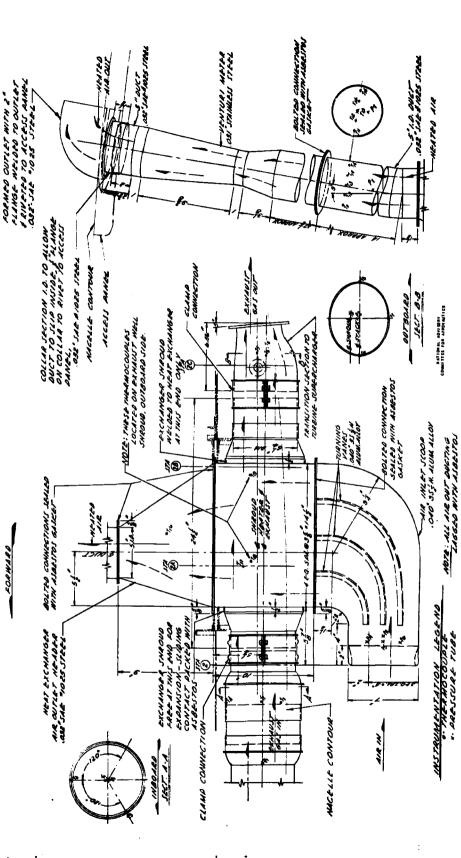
HEAT EXCHANGER S INSTALLATION IN MACELLE 4 SIDE VIEW, BITF AIROLANE.
